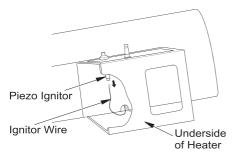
Removing Ignitor Wire from Piezo Ignitor
